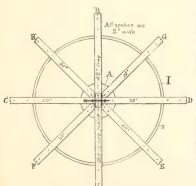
Showing Construction of Wheel and Sizes of Pieces
